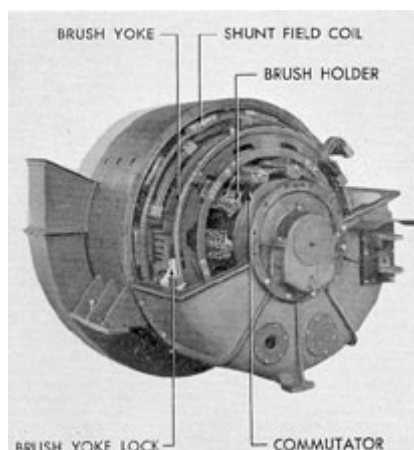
Commutator end view of Elliott main generator With front end bell removed.
